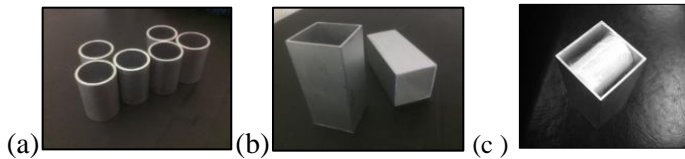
Fabricated components; a) circular tubes b) square tubes, and c) assembled structure
